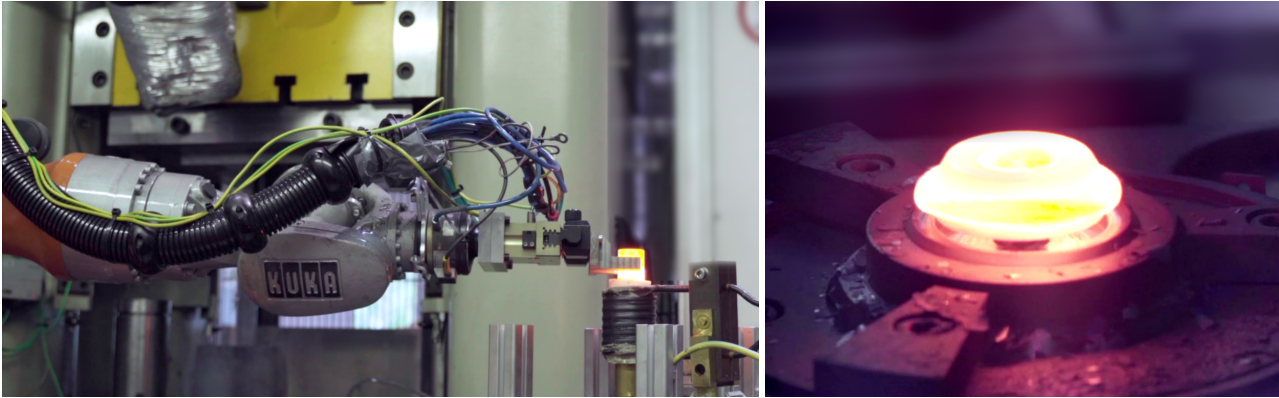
Forge loading mechanism and forged components. (left) Conventional loading of the induction heater and forge with raw material ($h = 40 \text{ mm}$, $r = 30 \text{ mm}$) by a robot-assisted high-temperature gripper. (right) Resulting formed workpiece.
